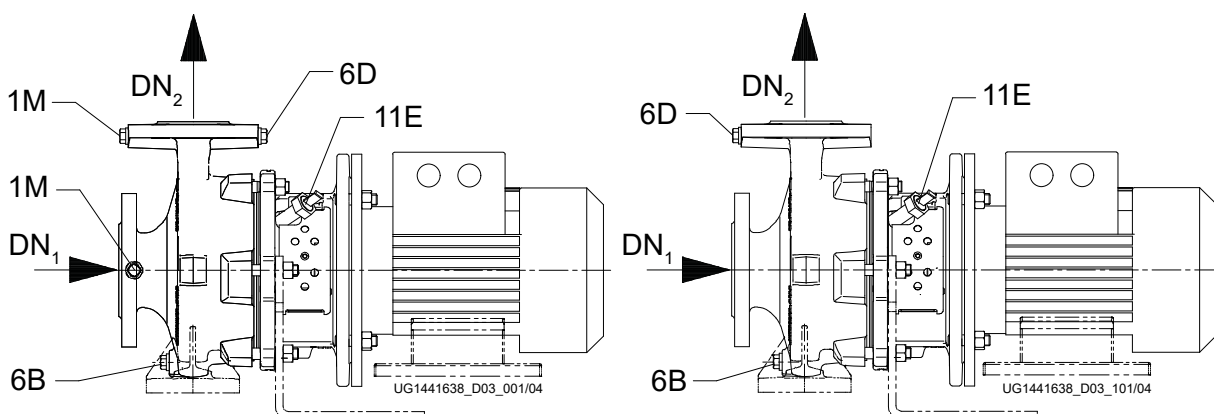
Left: Version with pressure gage connection; right: Version without pressure gage connection
